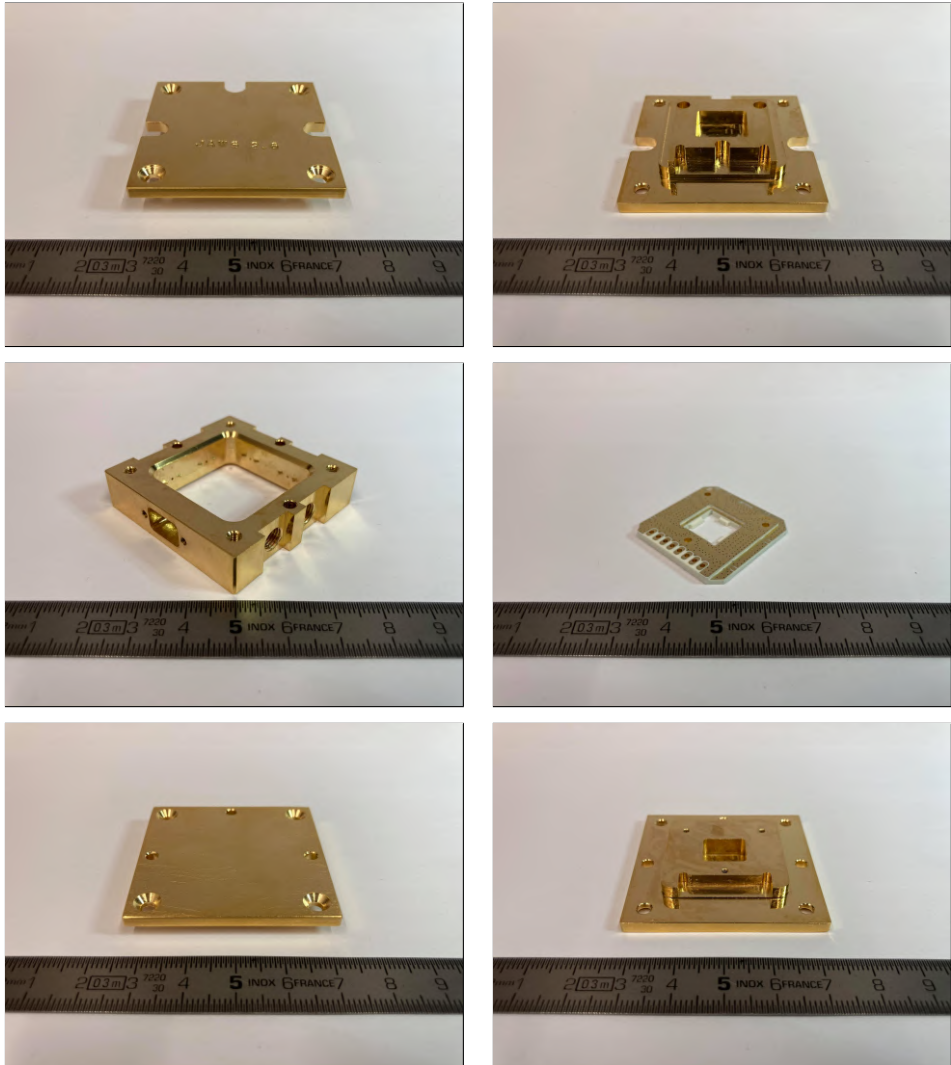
JAWS mechanical parts. Top: top part of the box. Middle: ring of the box and PCB. Bottom: bottom part of the box.
